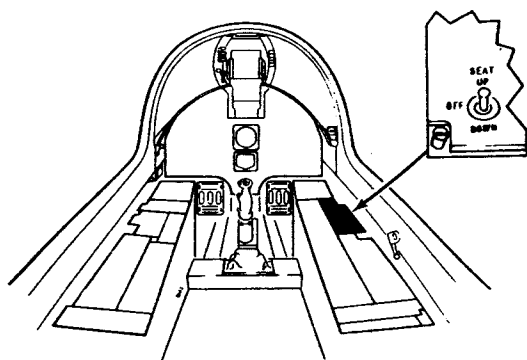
Ejection Seat Removal and Installation (Sheet 2)
